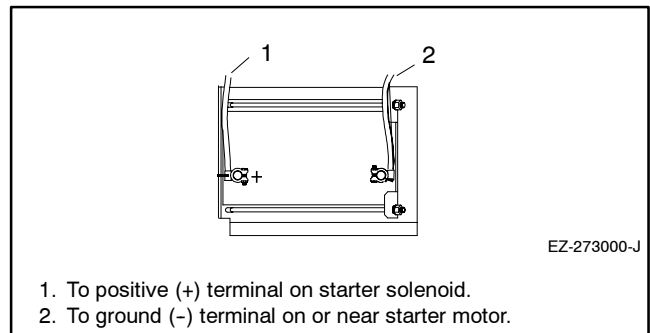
12-Volt Engine Electrical System Single Starter Motor, Typical Battery Connection
